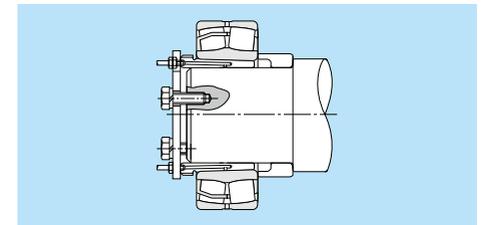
Installation using hydraulic withdrawal sleeve
